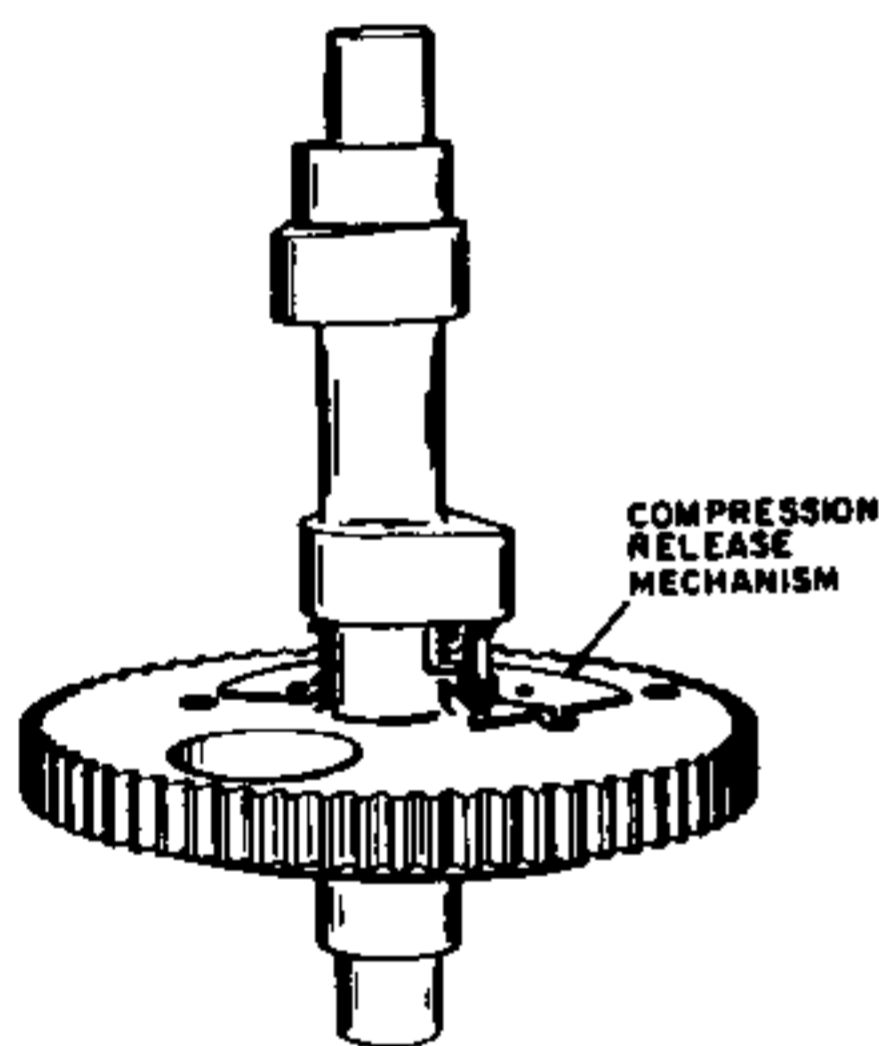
View of Insta-matic Ezee-Start compression release camshaft assembly used on all models except HH80, HH100 and HH120.
